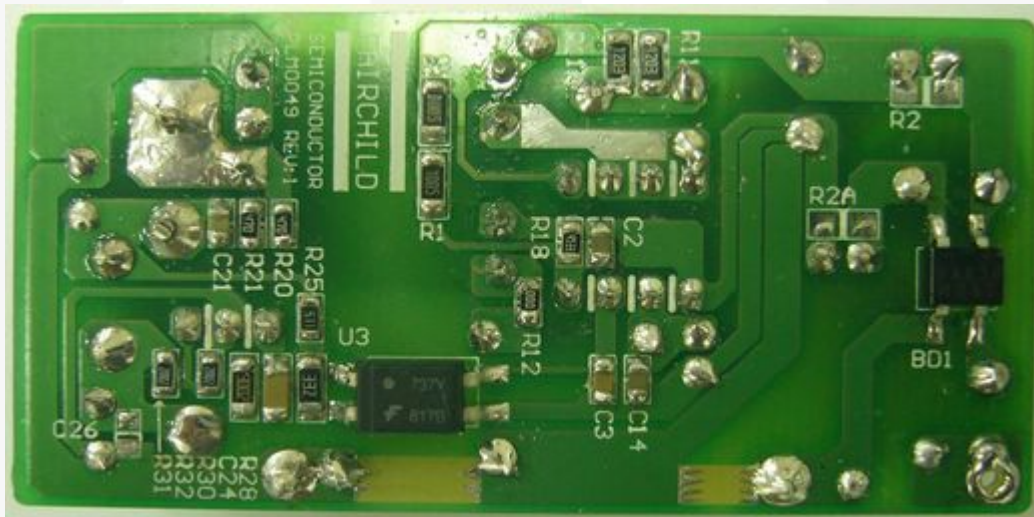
Bottom View (Dimension 64 x 33[mm²])
